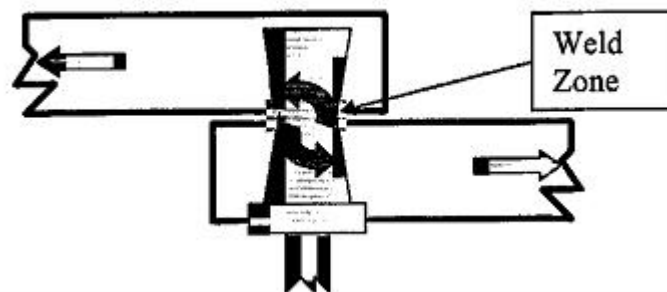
CROSS-SECTIONAL VIEW OF FSR IN WORKPIECE.
